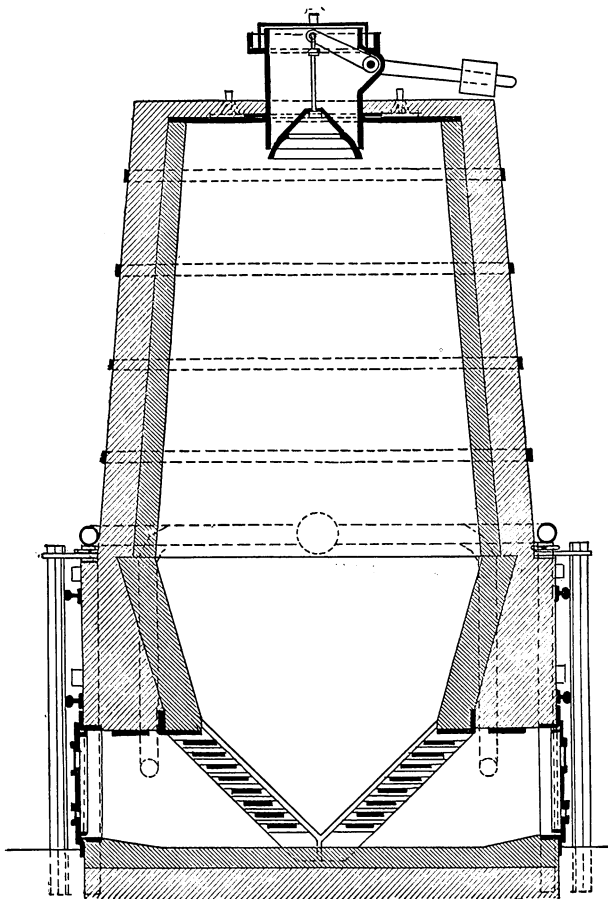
Gas Producer for Wood.—Section A D, Fig. 2.—Scale, 1:60.
